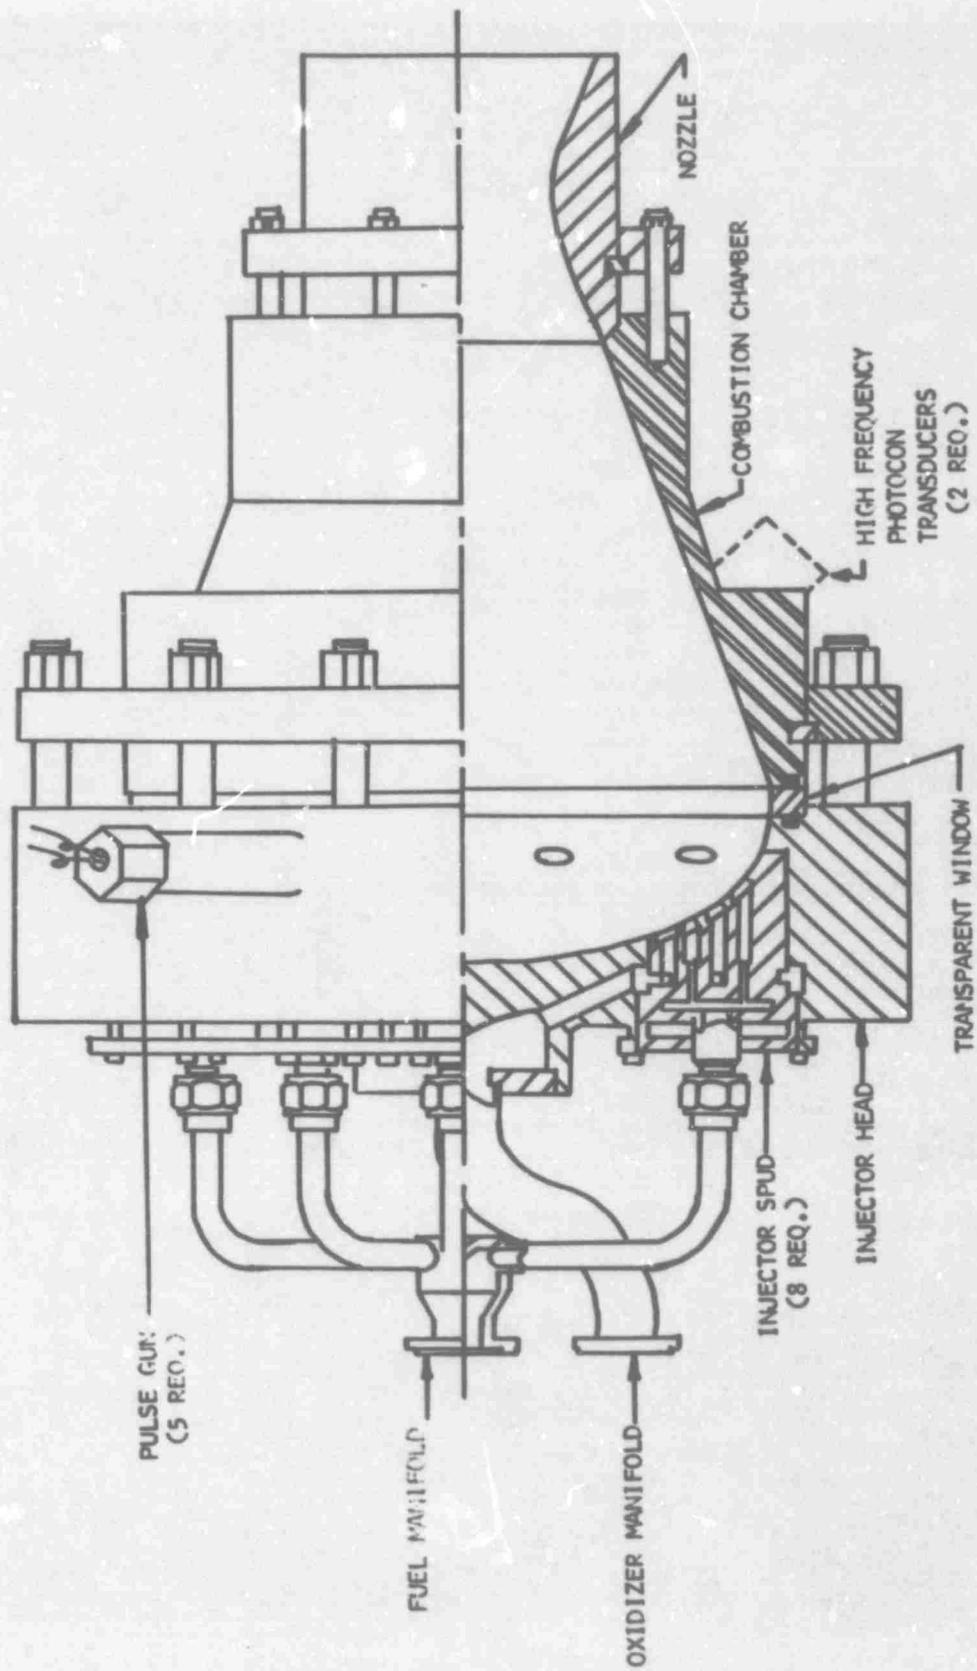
15" Diameter, Dished Head, Conical Pulse Motor Assembly Schematic
